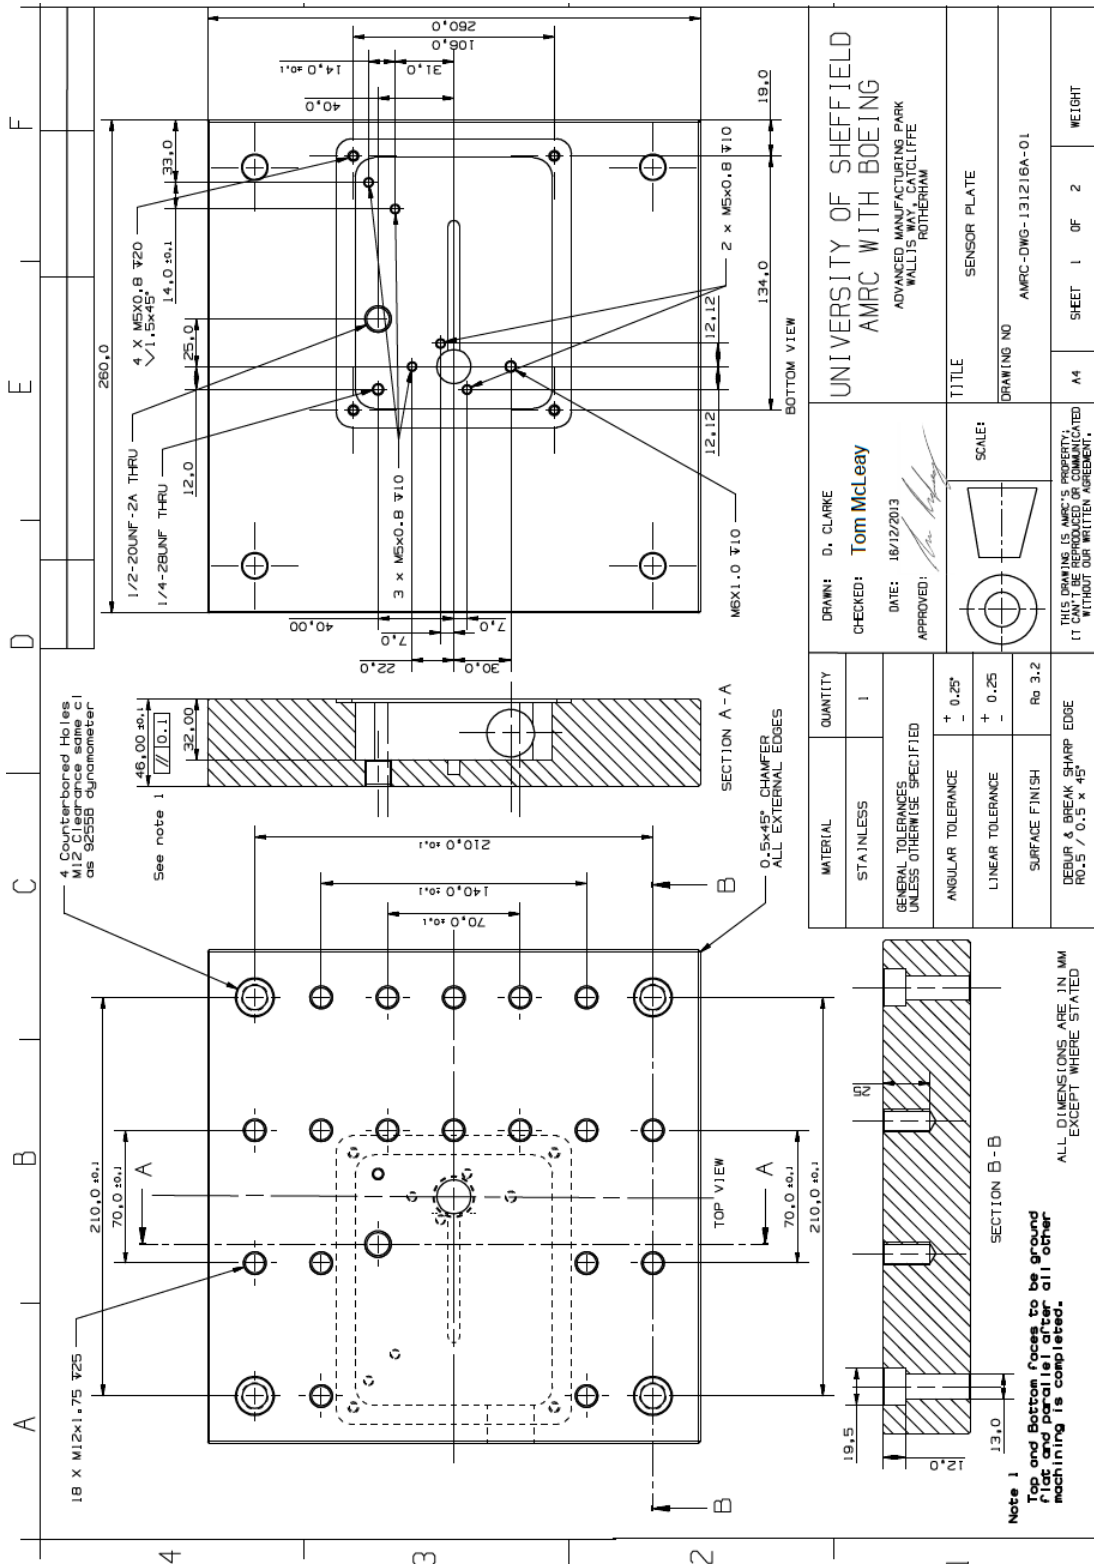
Sensor Enclosure Dimensioned Drawing
